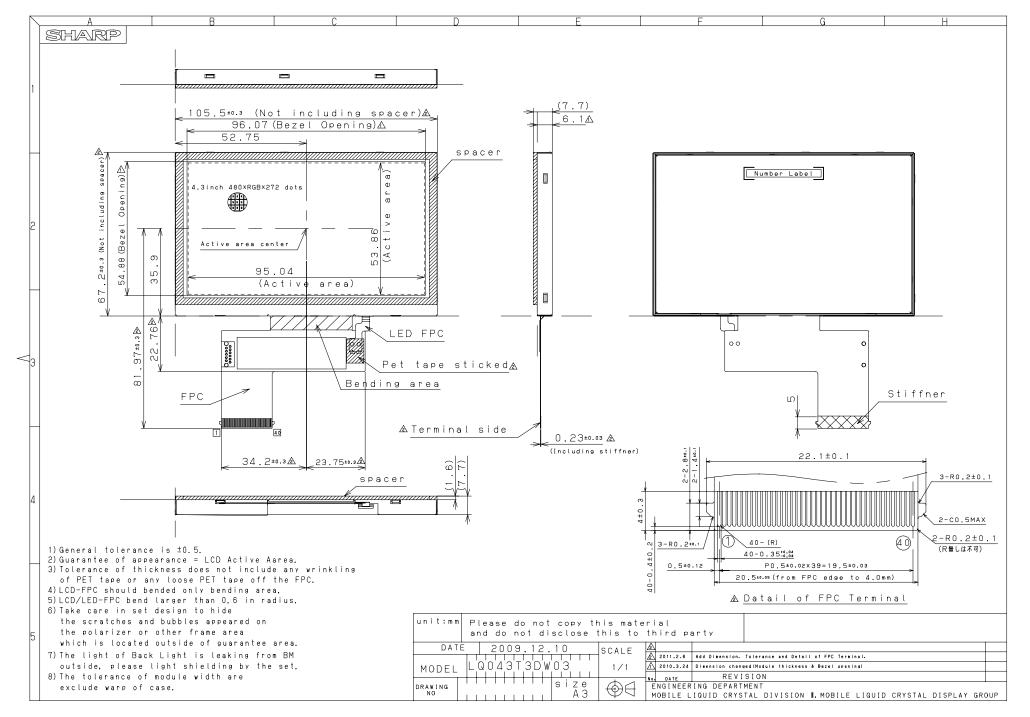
LQ043T3DW03 OUTLINE DIMENSIONS
